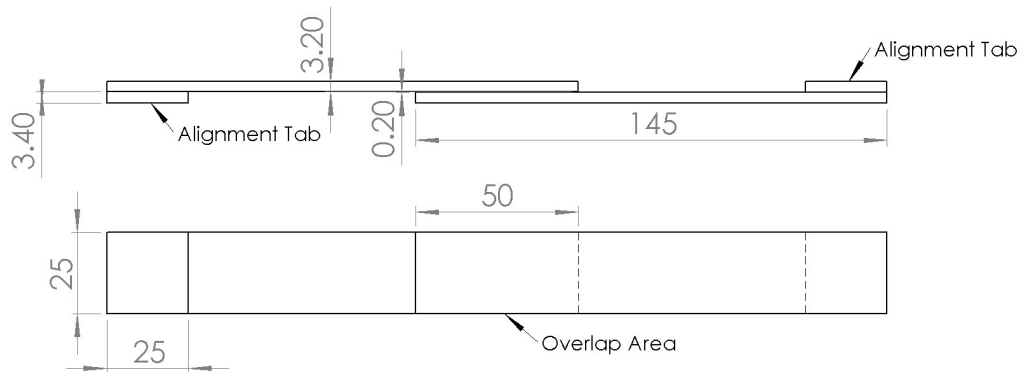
Single Lap Joint Geometry (dimensions in mm)
